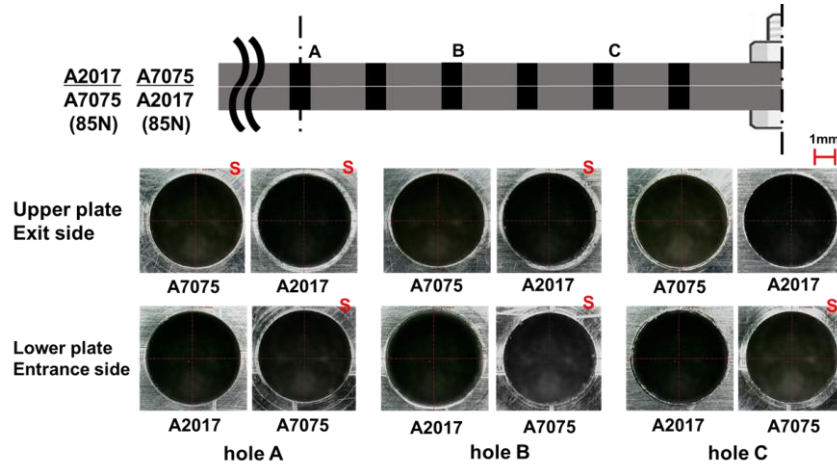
Appearance of workpiece after drilling in stacked plates from different materials.
